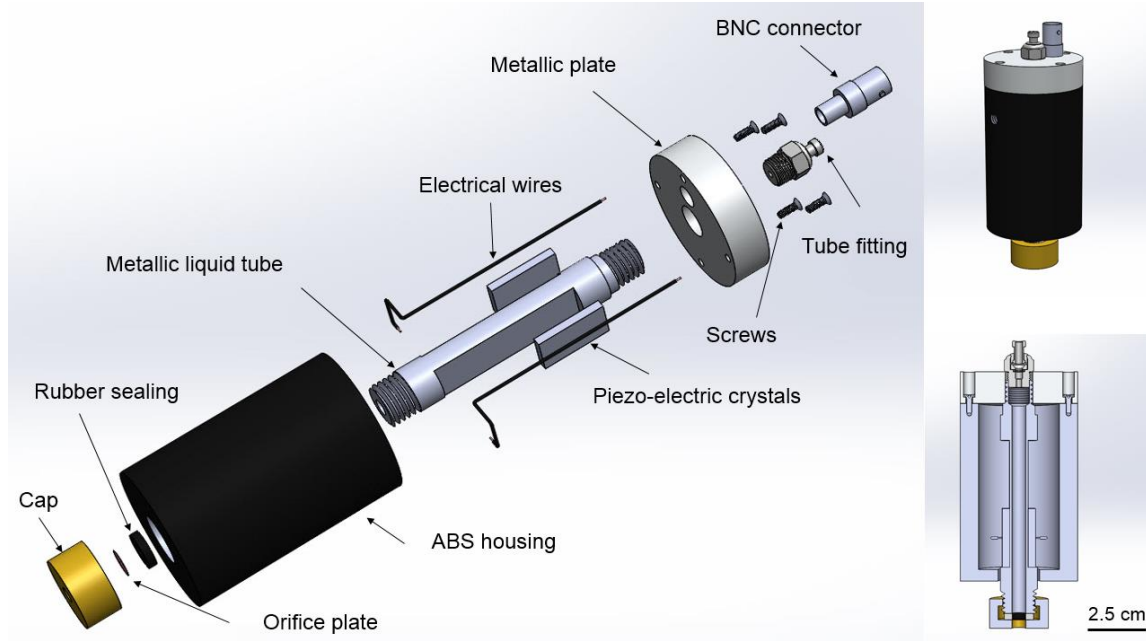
Components and 3-D CAD drawings of droplet impingement prototype
